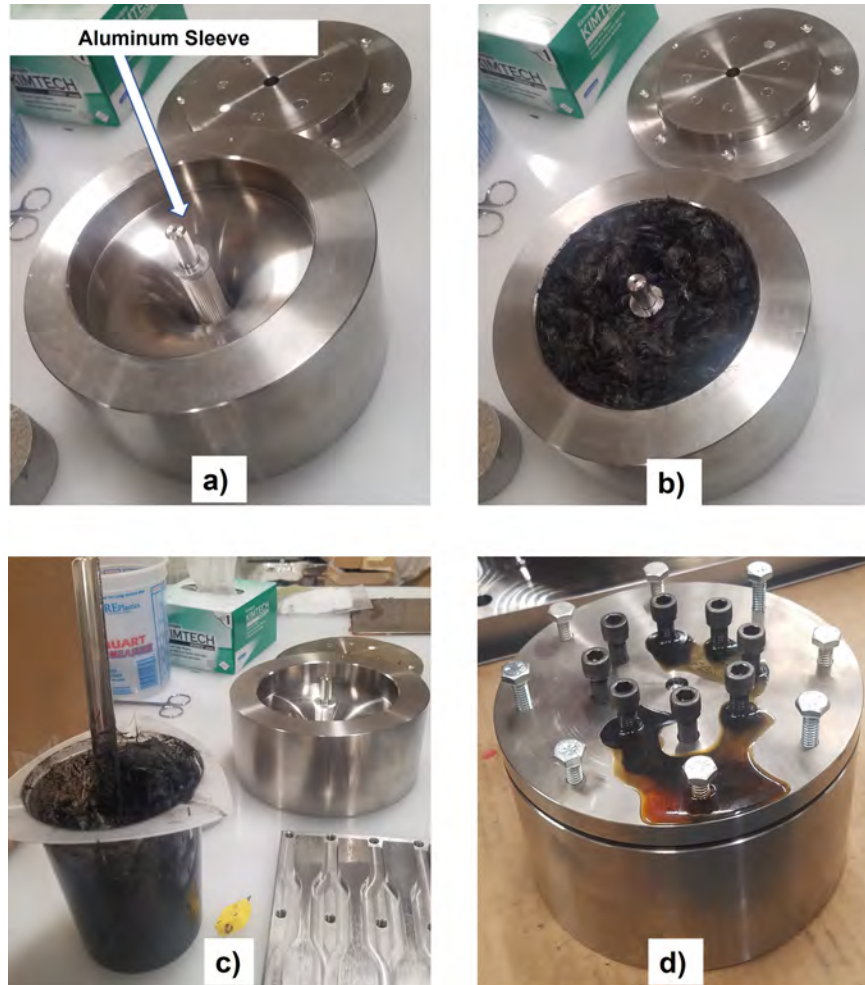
Compressor Hub Mold Processing a) Hub Mold b) Hub Mold with Epoxy c) Preparing Hub Mold for Processing d) Post-Compression Hub Mold
